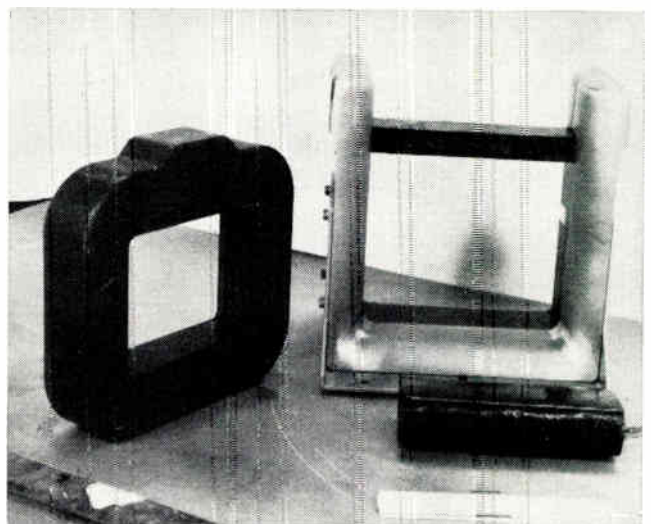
High voltage coils and core of Fig. 3a before assembly.
